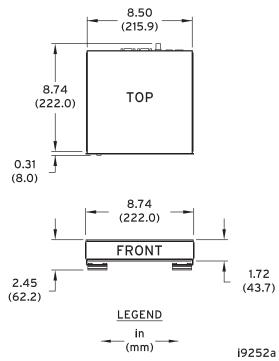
SEL-3530-4 DIN-Mount Dimensions
